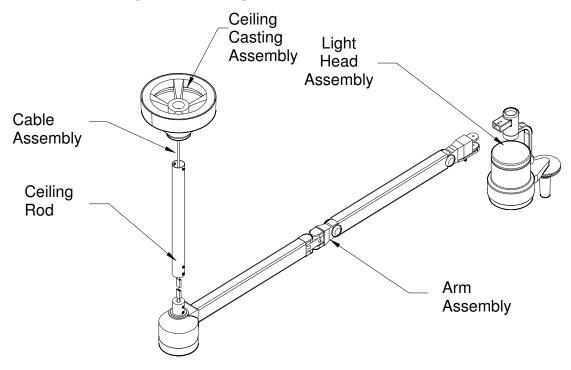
Sub-Assemblies for Single Ceiling Mount
